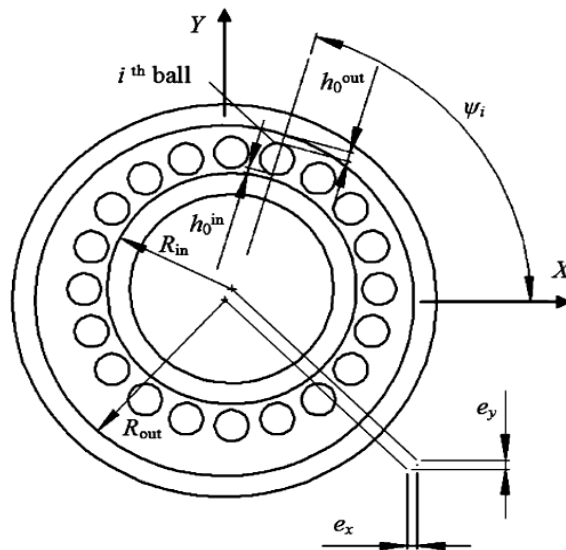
Cross section of the ball bearing including the oil film thickness [1, p. 605].
